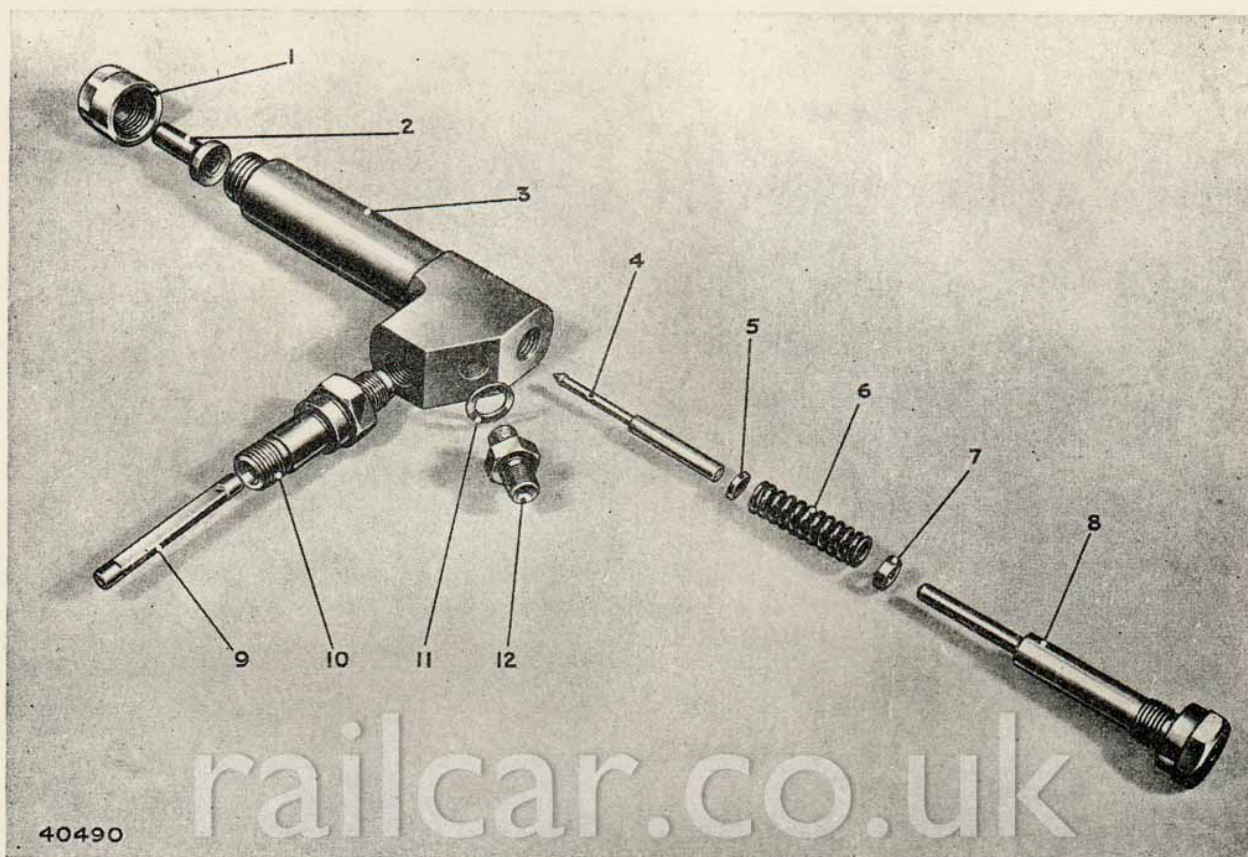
EXPLODED VIEW OF INJECTOR UNIT.
